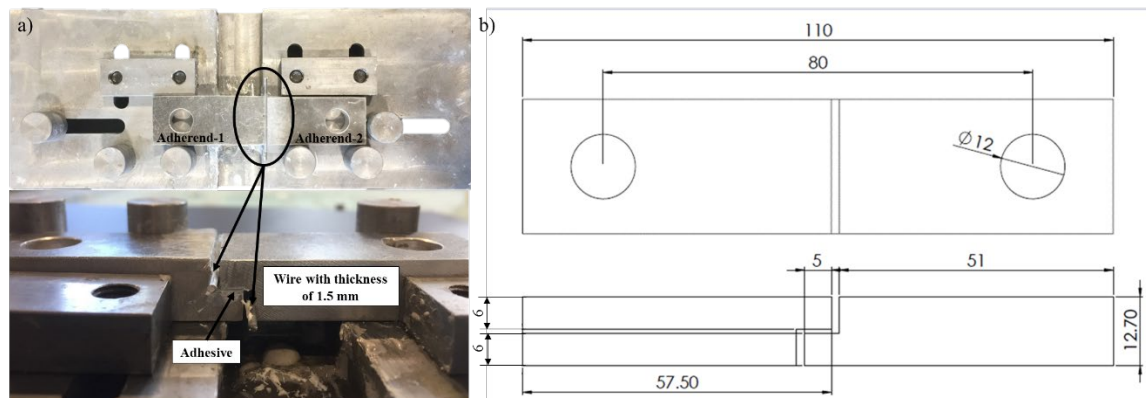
(a) Shows the fixture for alignment and wires location to control the gap between adherend (b) the configuration of TAST specimens (Units in mm)
